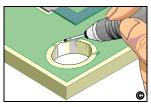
Mill away damaged material with the Micro-Drill and ball mill.
